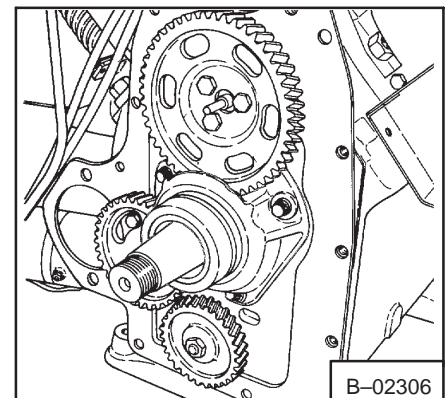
A-22a Crankshaft Seal Location (3 Bearings)
